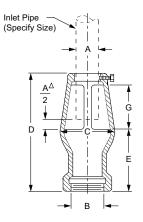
T THREADED OUTLET ONLY (Specify A + B)
